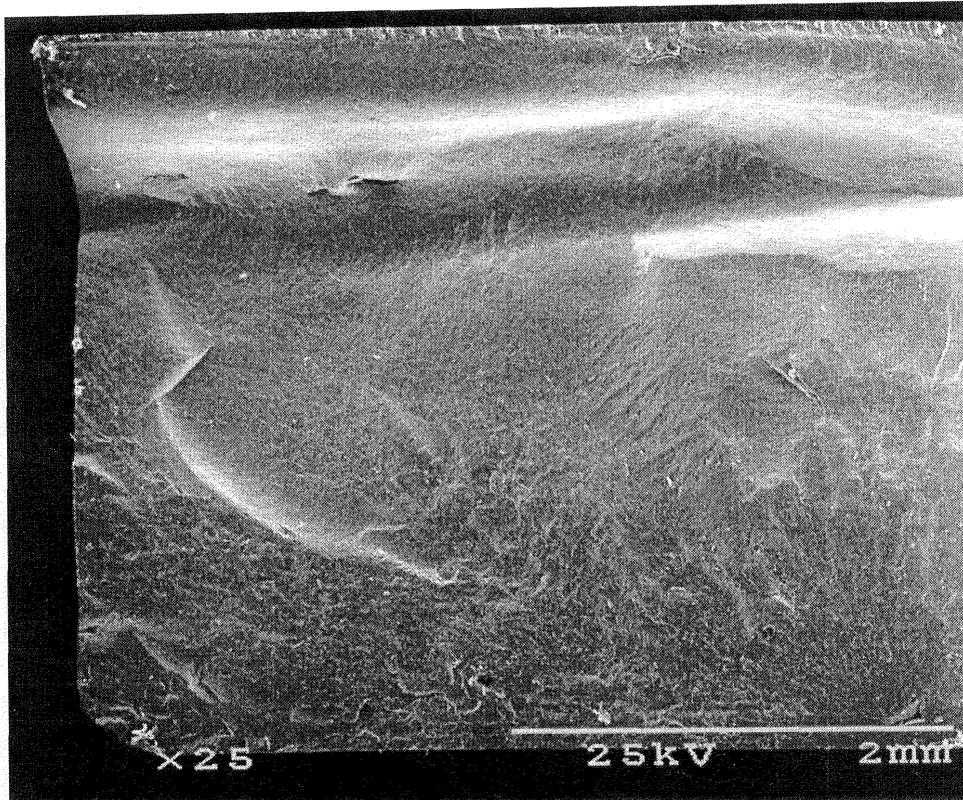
Low magnification image of the fracture surface of freeformed flexural test bars.
